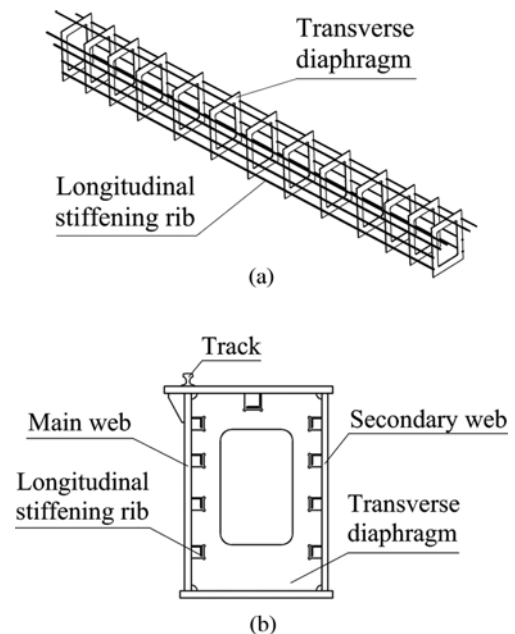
Layout of Stiffeners in Bias-Rail Box Girder: (a) Internal Structure, (b) Cross Section
